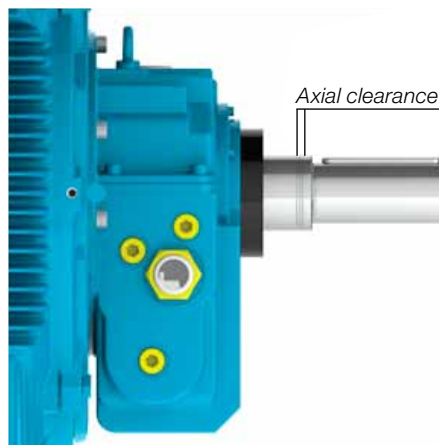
Axial clearance of motor designed with sleeve bearing
